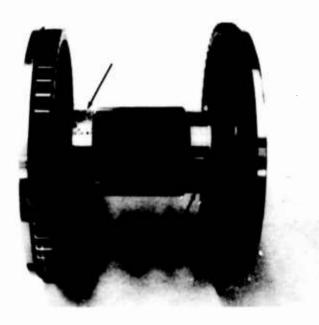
Spalled Rollers - First-Row Pinion Test Gearbox.
